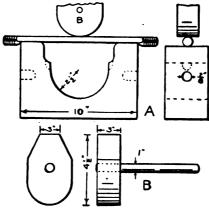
METHOD OF BENDING WITH BLOCK AND TOOL.
